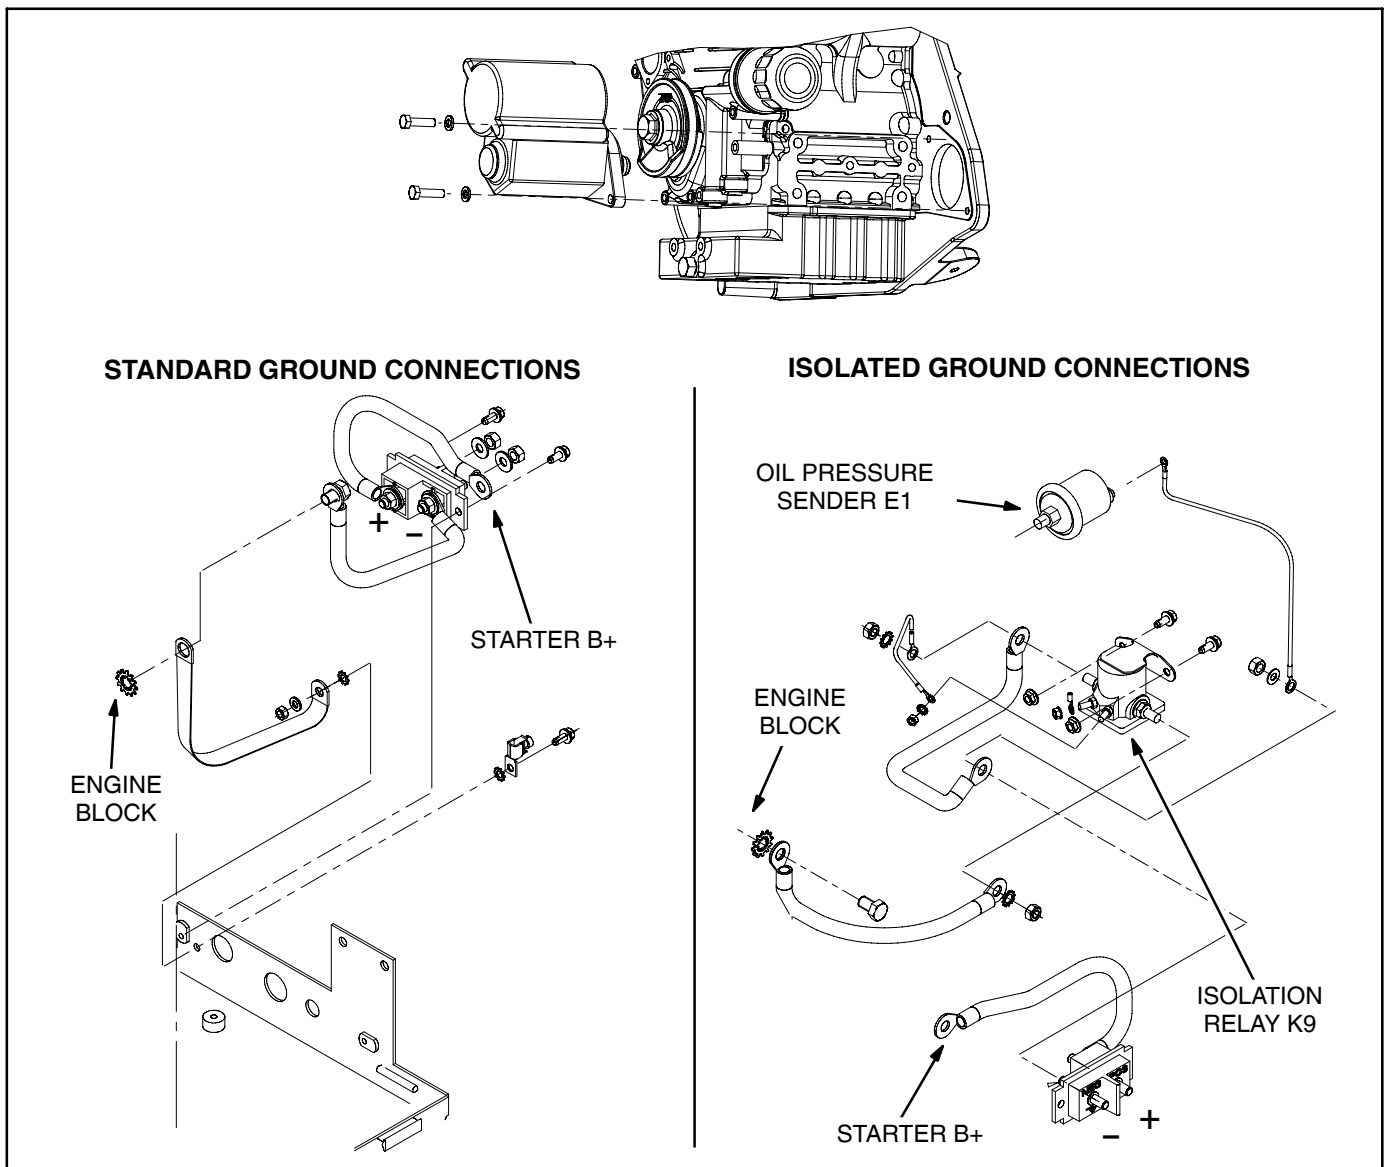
STARTER MOTOR MOUNTING AND CONNECTIONS
